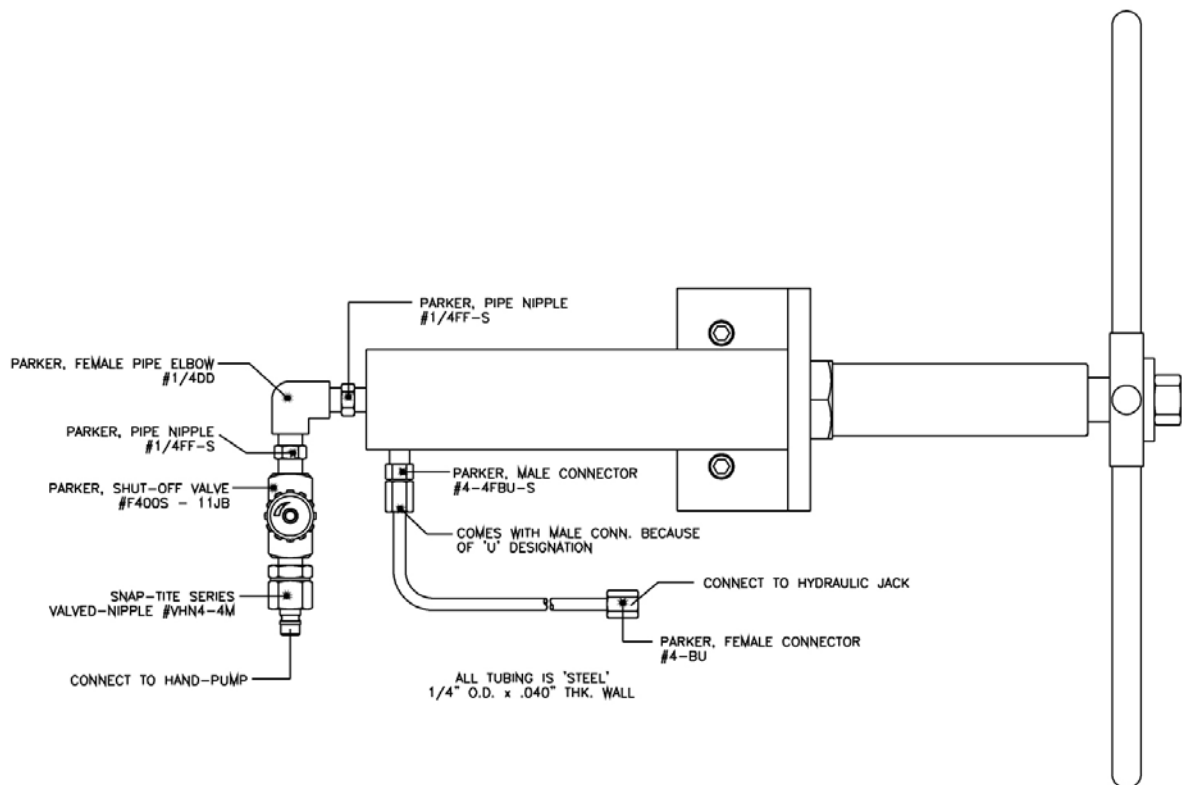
Morehouse Screw Pump with Safety Check Valve (Drawing 075-806000)
